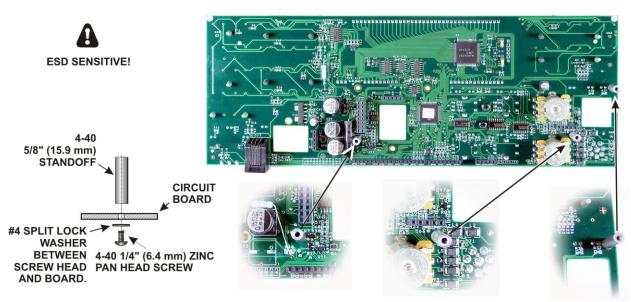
Preparing the Front Panel Board for Mounting, Part 1.
